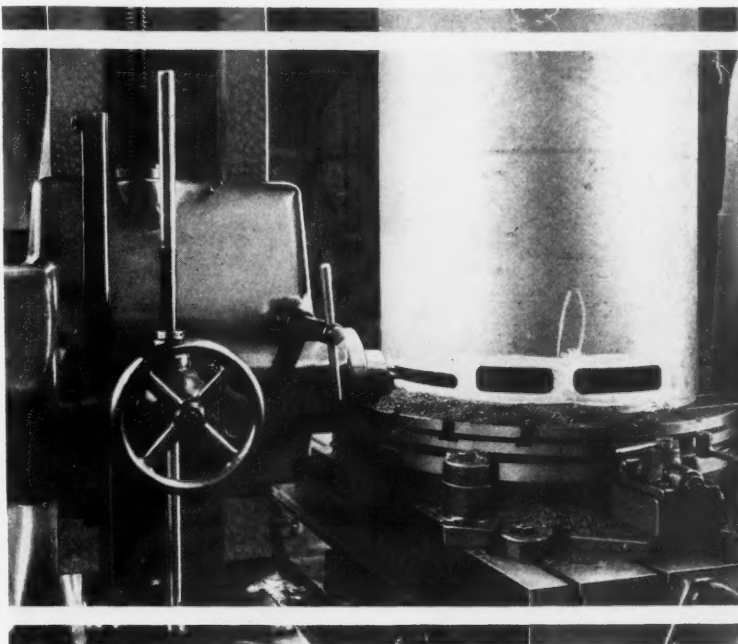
Lucas Horizontal Boring, Drilling, and Milling Machine in a Railroad Shop Engaged in Milling Ports in Locomotive Cylinder Bushings
